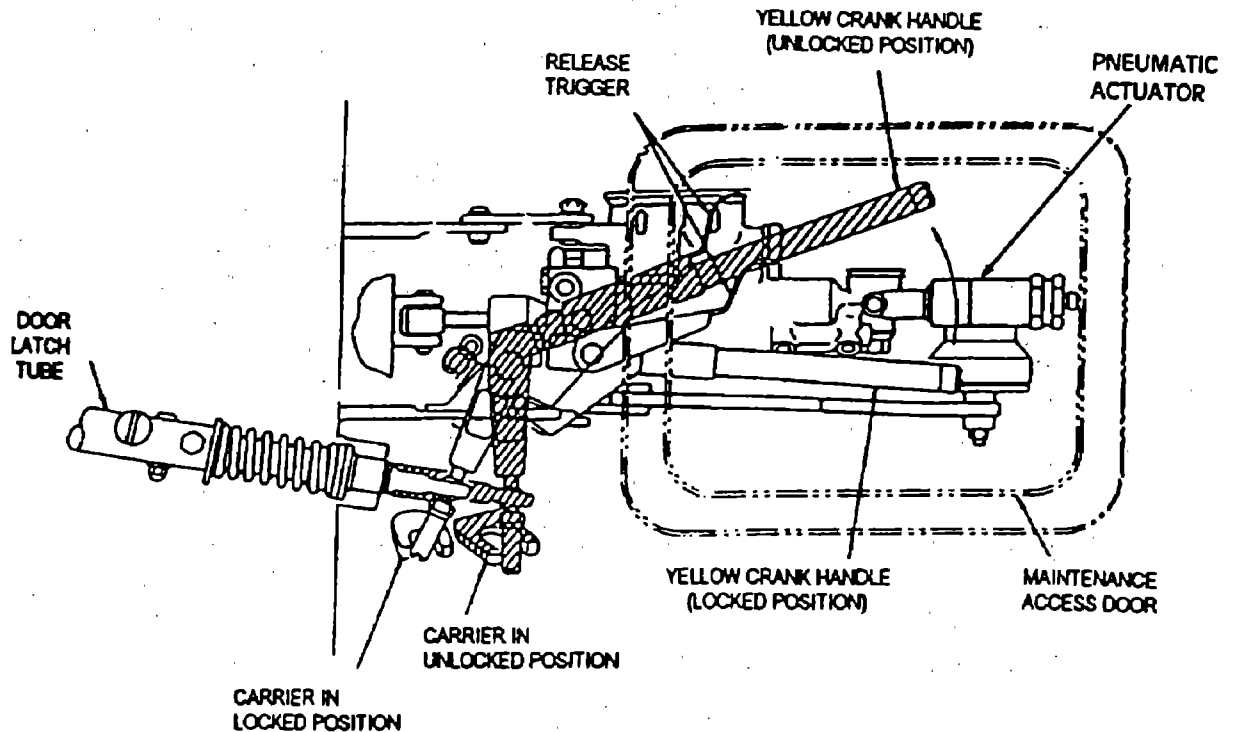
B-757 Off-Wing Escape Slide Actuator Assembly
